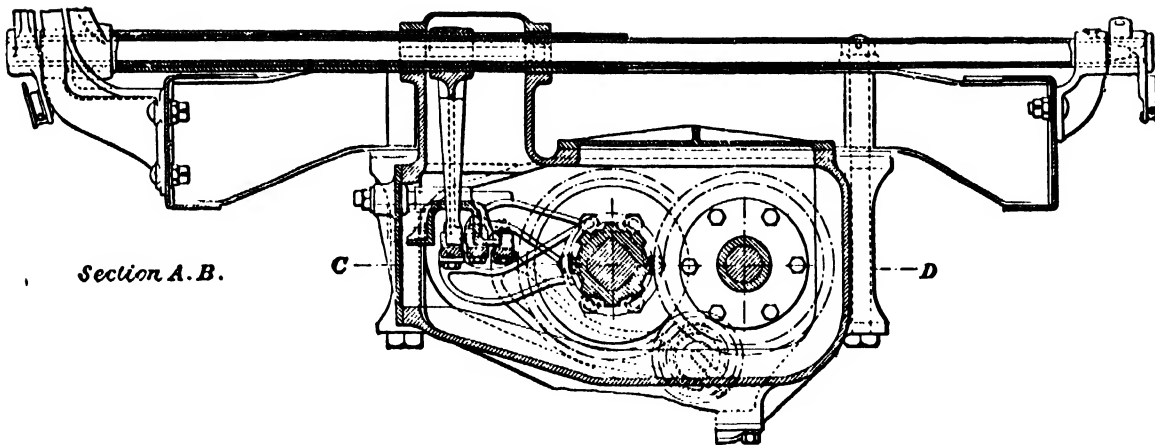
Siddeley Gear Box. Sectional End Elevation
